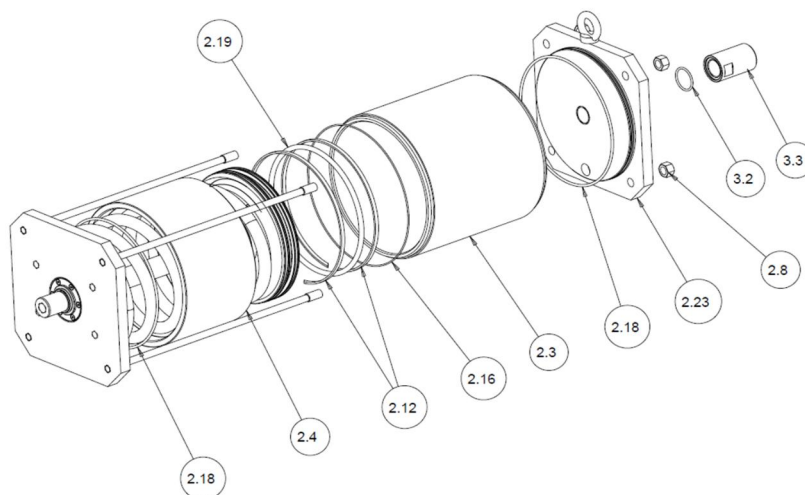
Pneumatic cylinder seals replacement of single acting actuator
